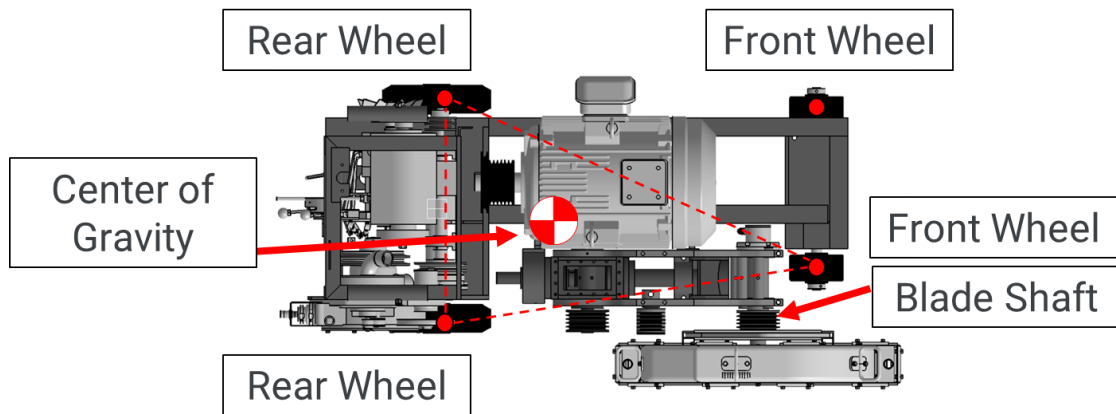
Center of Gravity and Mounting Positions of Blade and Wheels
